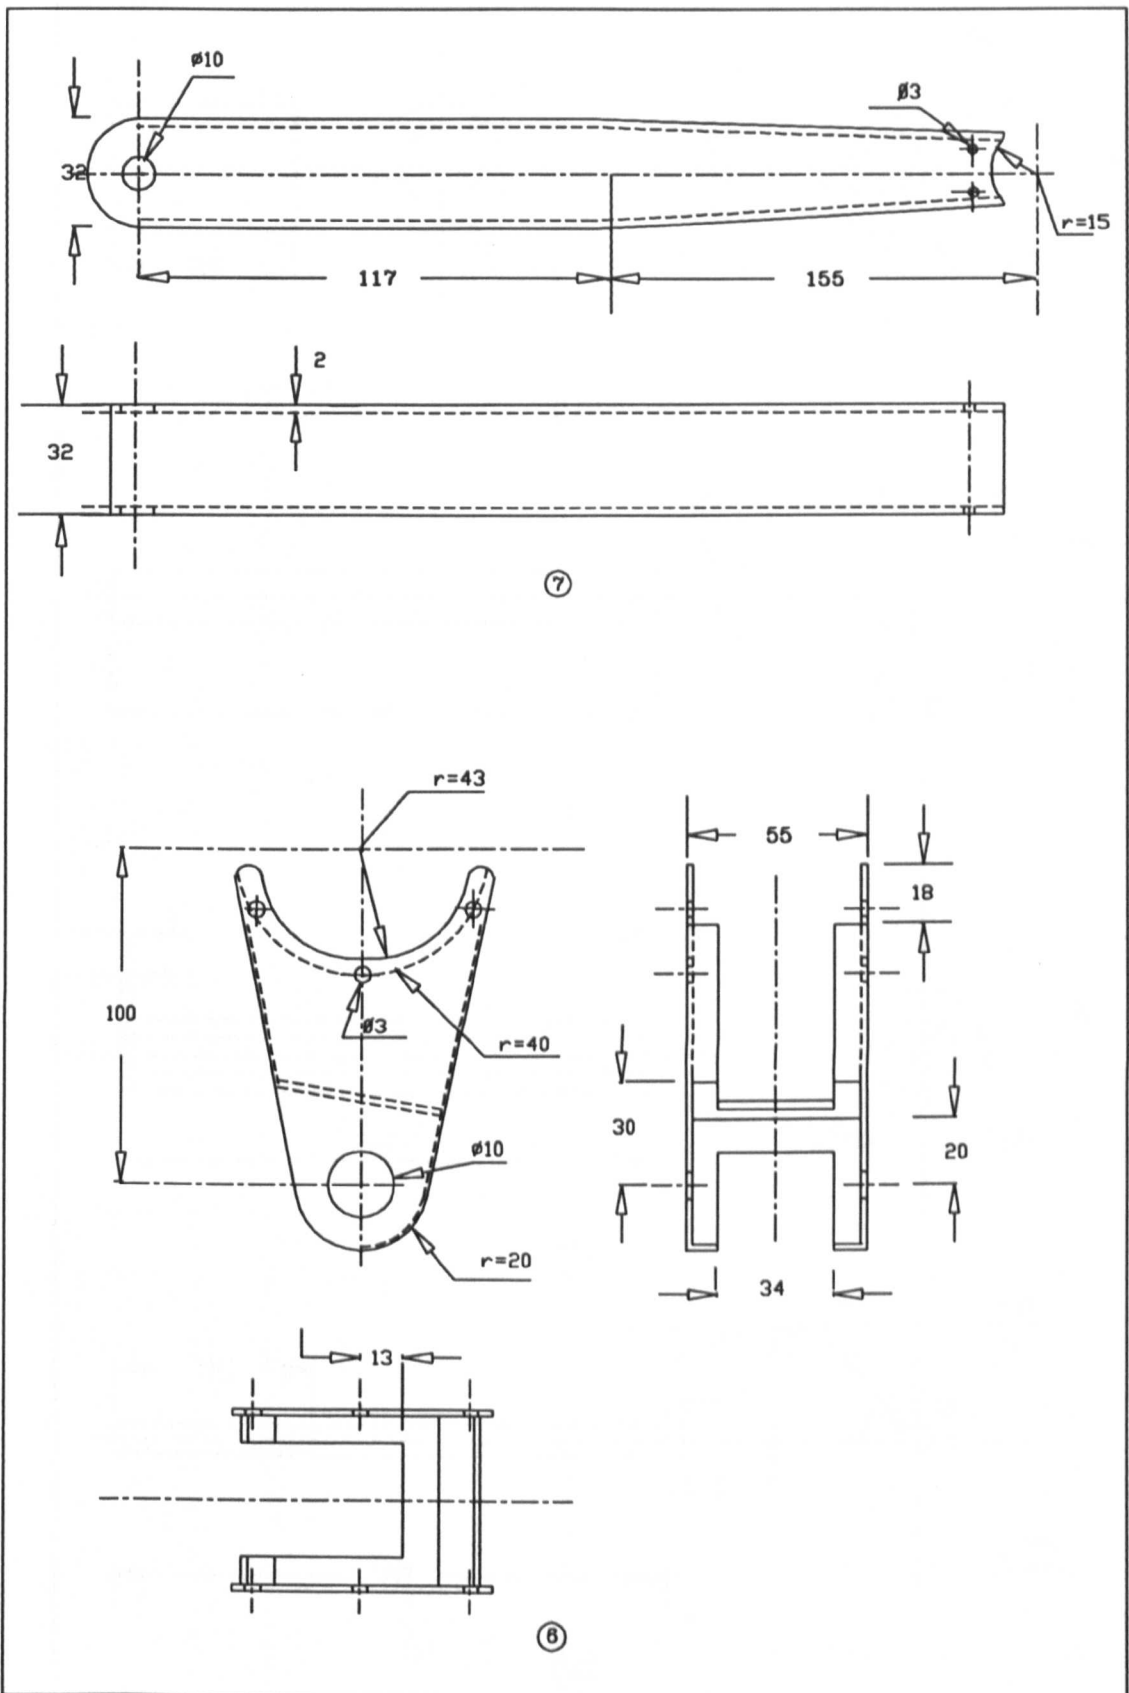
Technical drawings of the carbon-fibre crank and coupler link.
